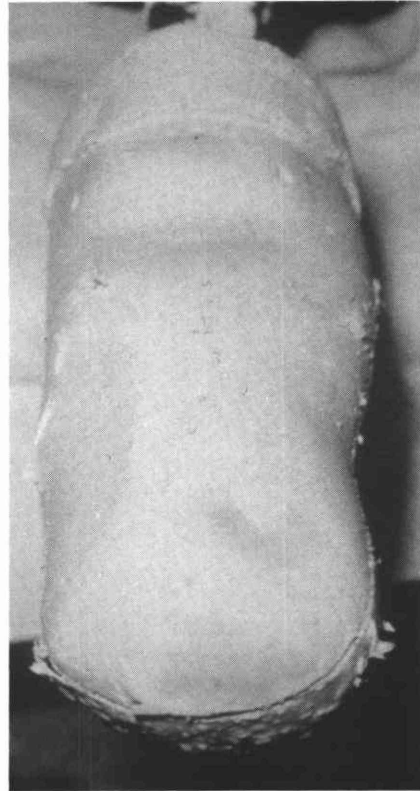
Alginate is removed from new positive model before smoothing and vacuum-forming definitive socket or a new check socket.
